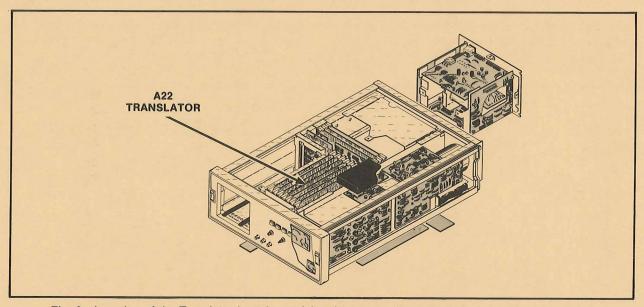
Location of the Translator board containing the jumper that selects the message terminator.
